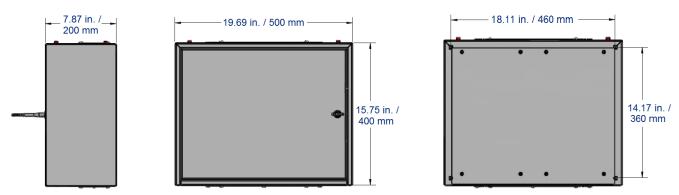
SINGLE SK Enclosure Overall and Mounting Dimensions
